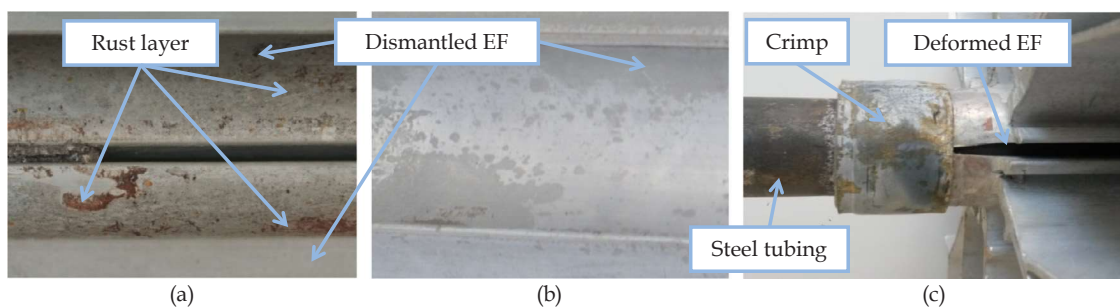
Operating conditions testing: Dismantled components after testing under operating conditions. Inner side of a fin from a (a) clipped assembly and (b) crimped assembly. (c) Crimped assembly showing gap between fins and tube.
